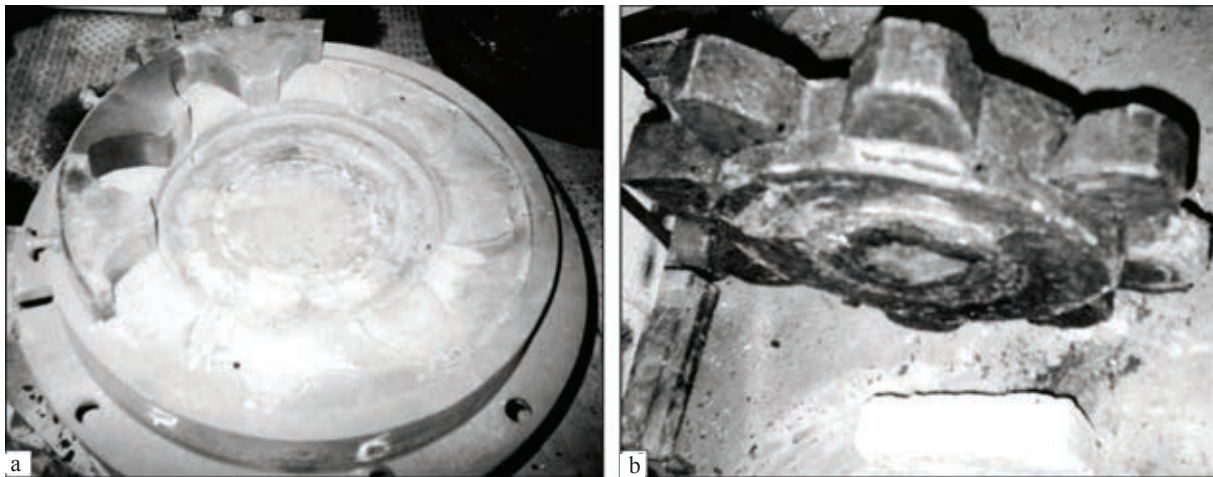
Sectional single-position ingot moulds for centrifugal electroslag casting (a) and a cast blank of a ??? (b).
